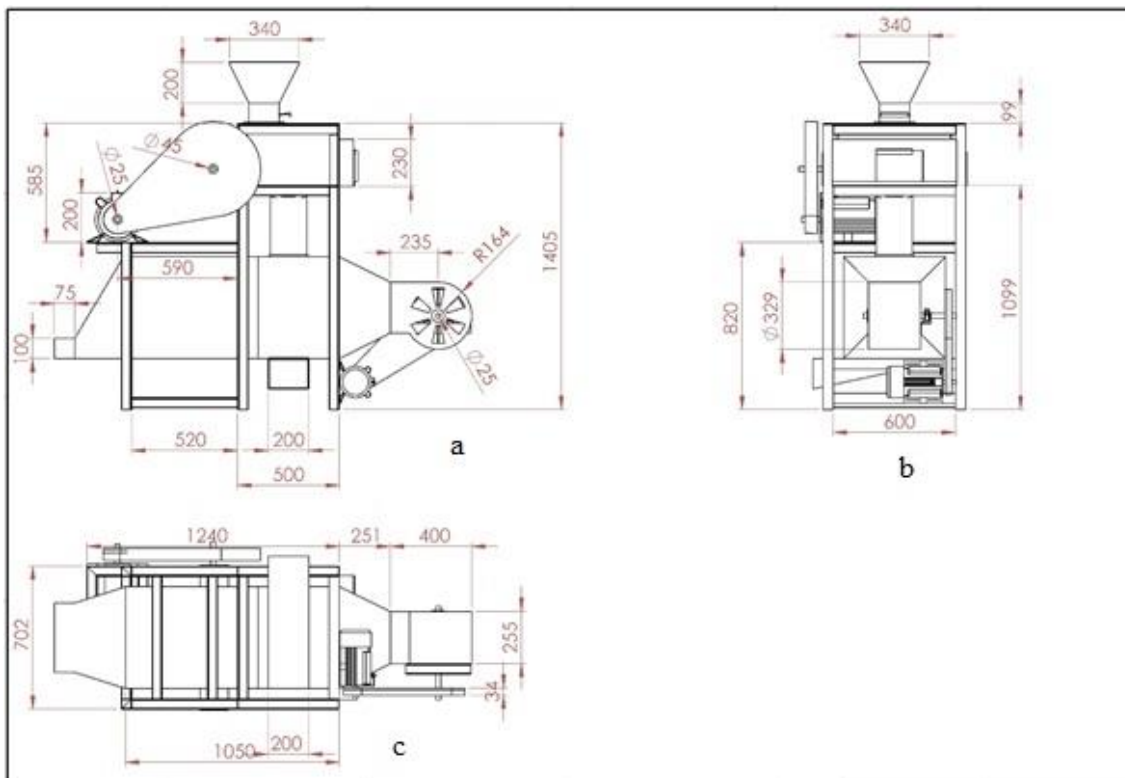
Orthographic views for side elevation (a), front elevation (b), and plan elevation (c)
